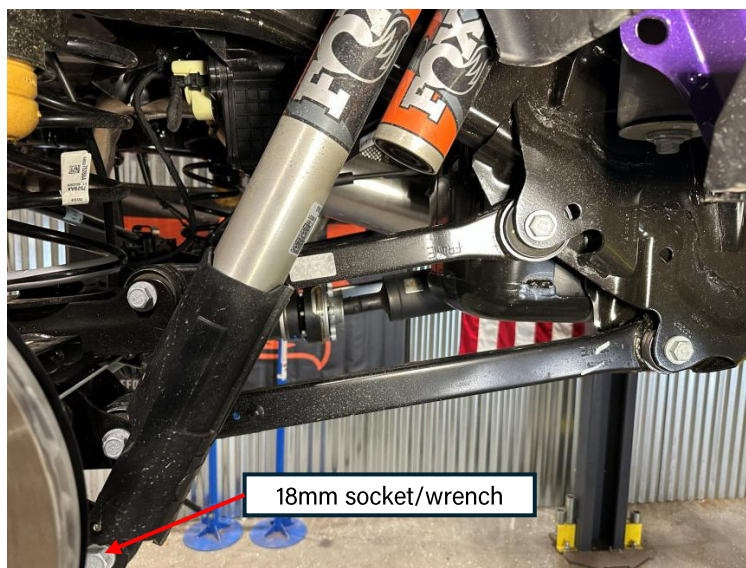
Rear passenger/driver-side lower shock bolts to be removed
